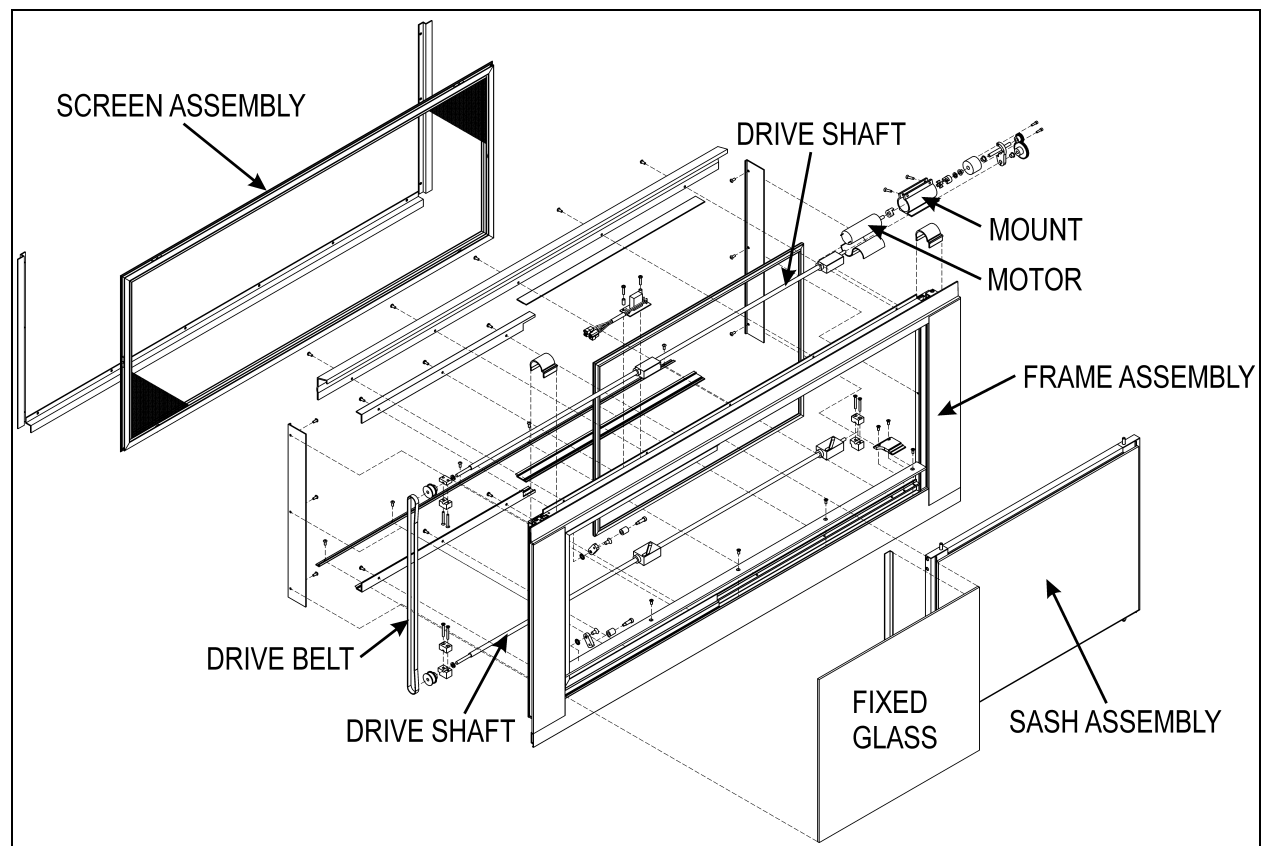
ELECTRIC SLIDING WINDOW EXPLODED VIEW
